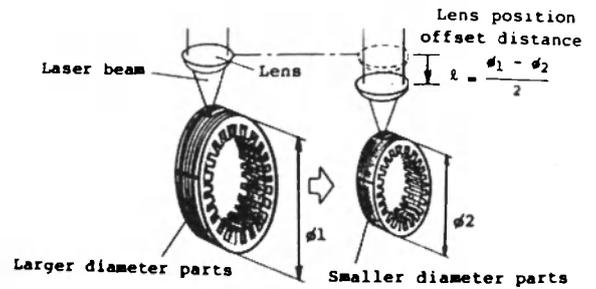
Laser welding of core laminations stacking of different sizes in auto parts
